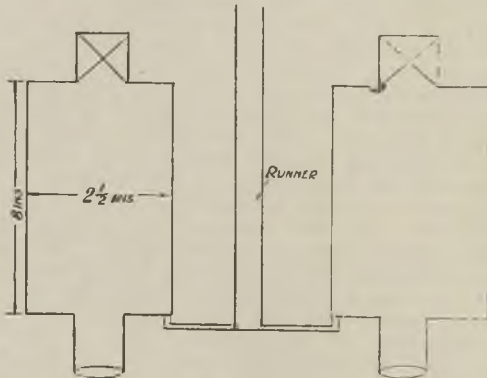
THE FAST RUNNING OF THIS CASTING RESULTS IN A SINK HOLE IN THE POSITION SHOWN.
